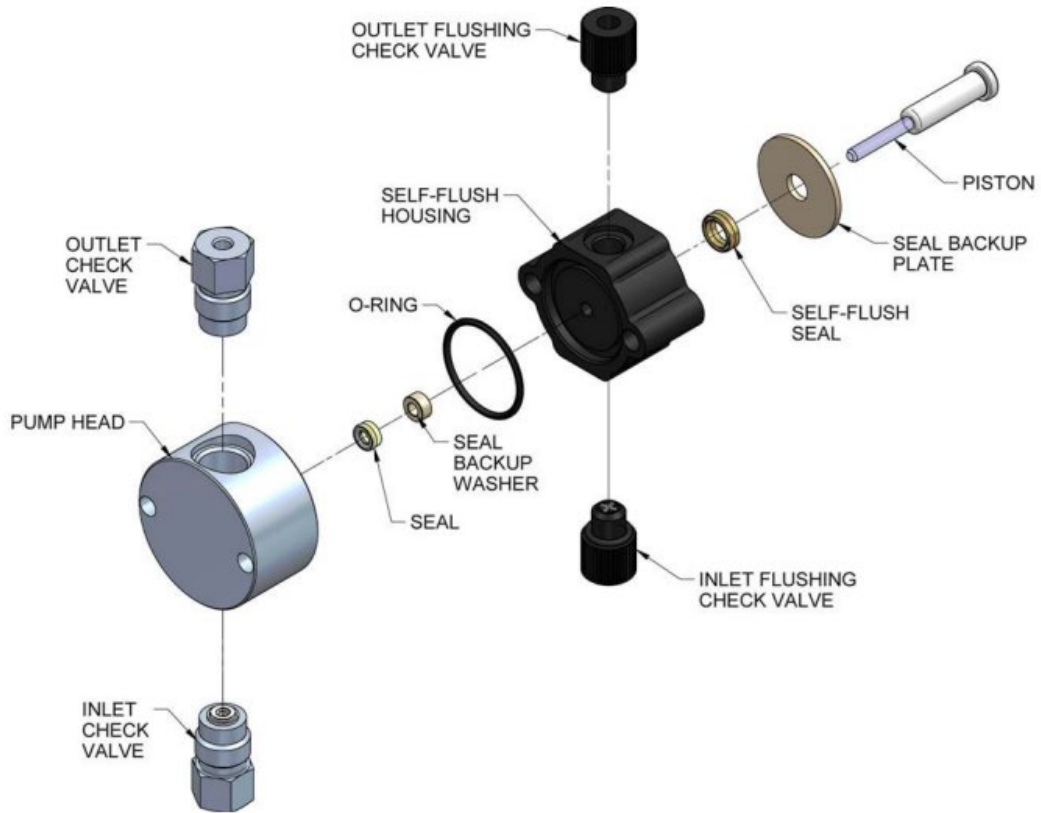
, Stainless Steel Self-Flushing Pump Head Assembly
